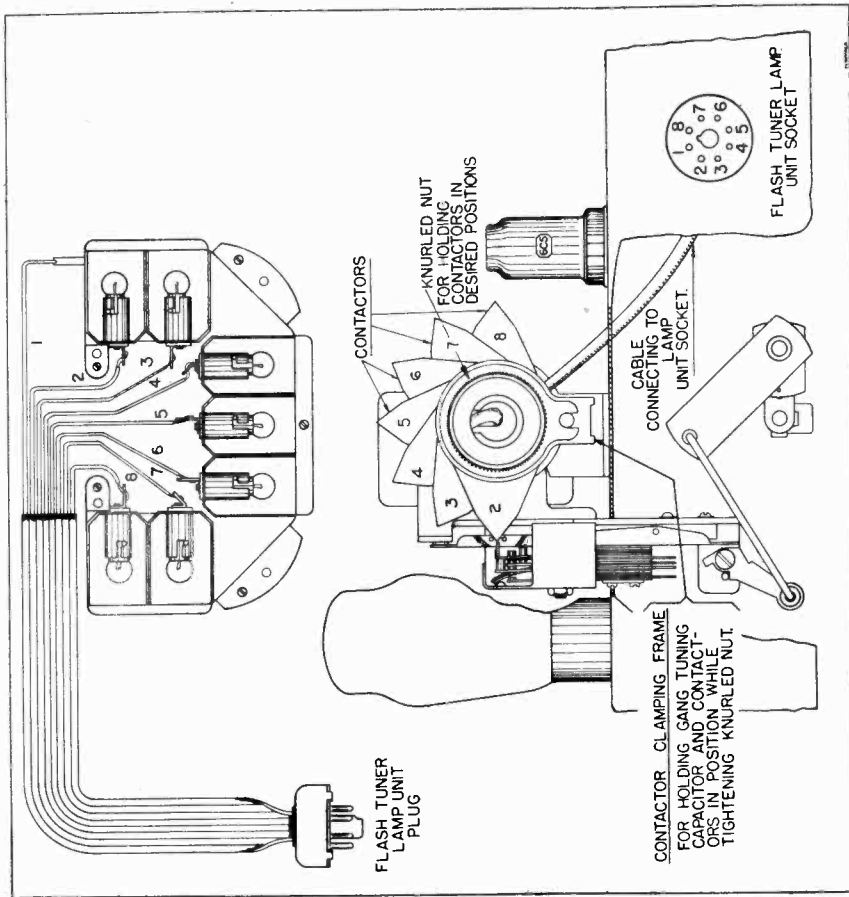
Showing Flash Tuner Lamp Unit With Escutcheon Plate Removed (Top Figure) and Rear View of Receiver Showing Flash Tuner Mechanism (Bottom Figure).
